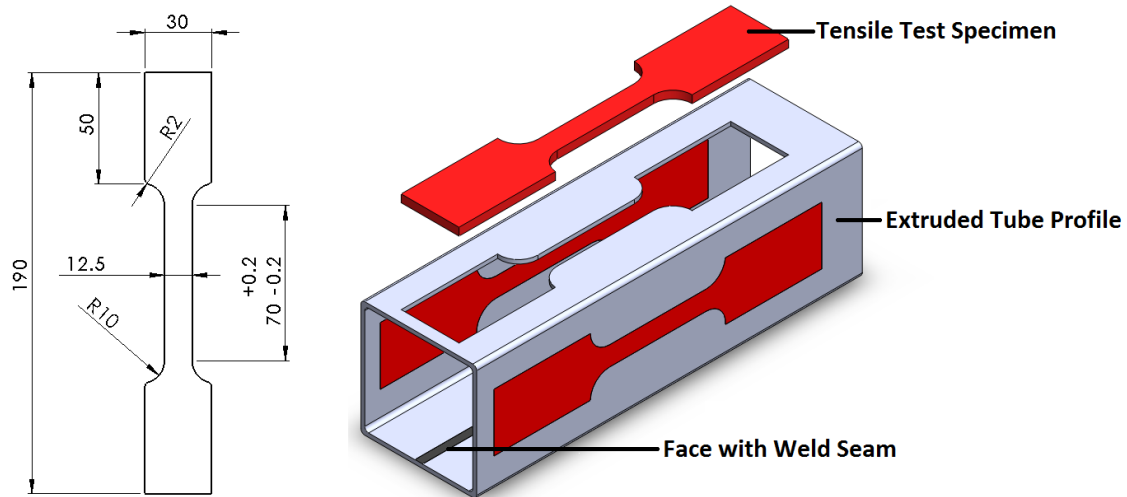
Tensile test specimen dimensions and extraction from the steel tube
